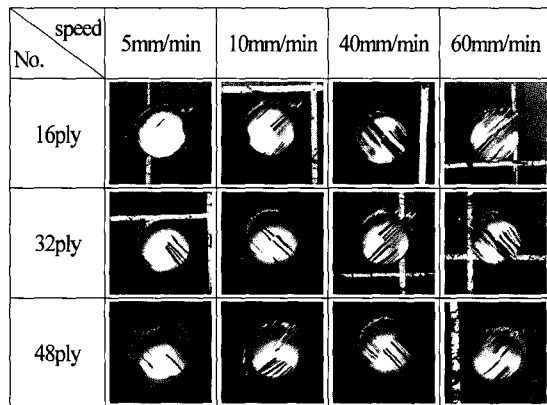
Photograph on exit side of drilled specimen (ϕ : 12mm, rpm: 800)
